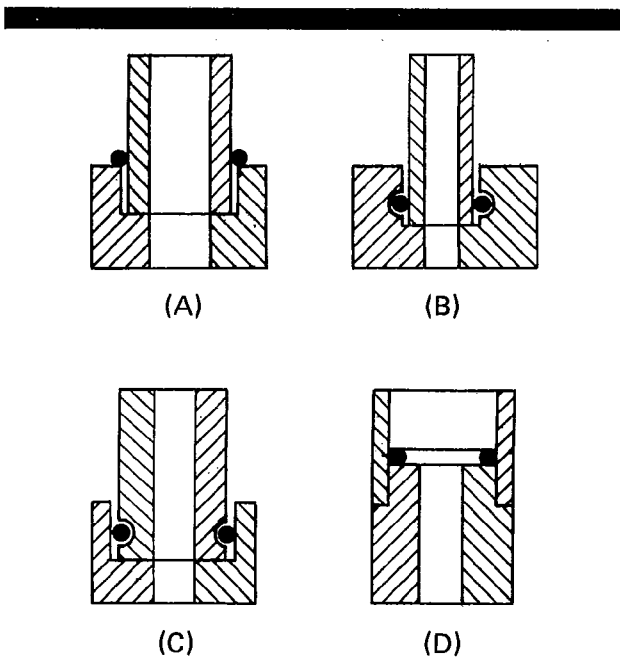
Methods of Preplacing Brazing Filler Wire
